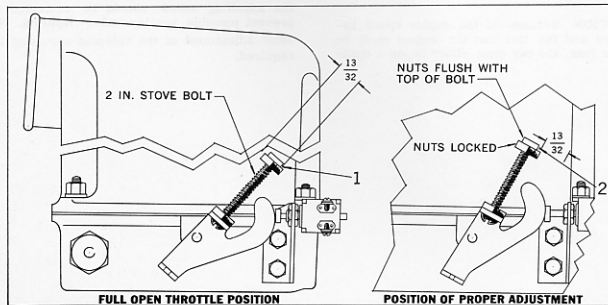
KICK-DOWN SWITCH ADJUSTMENT
